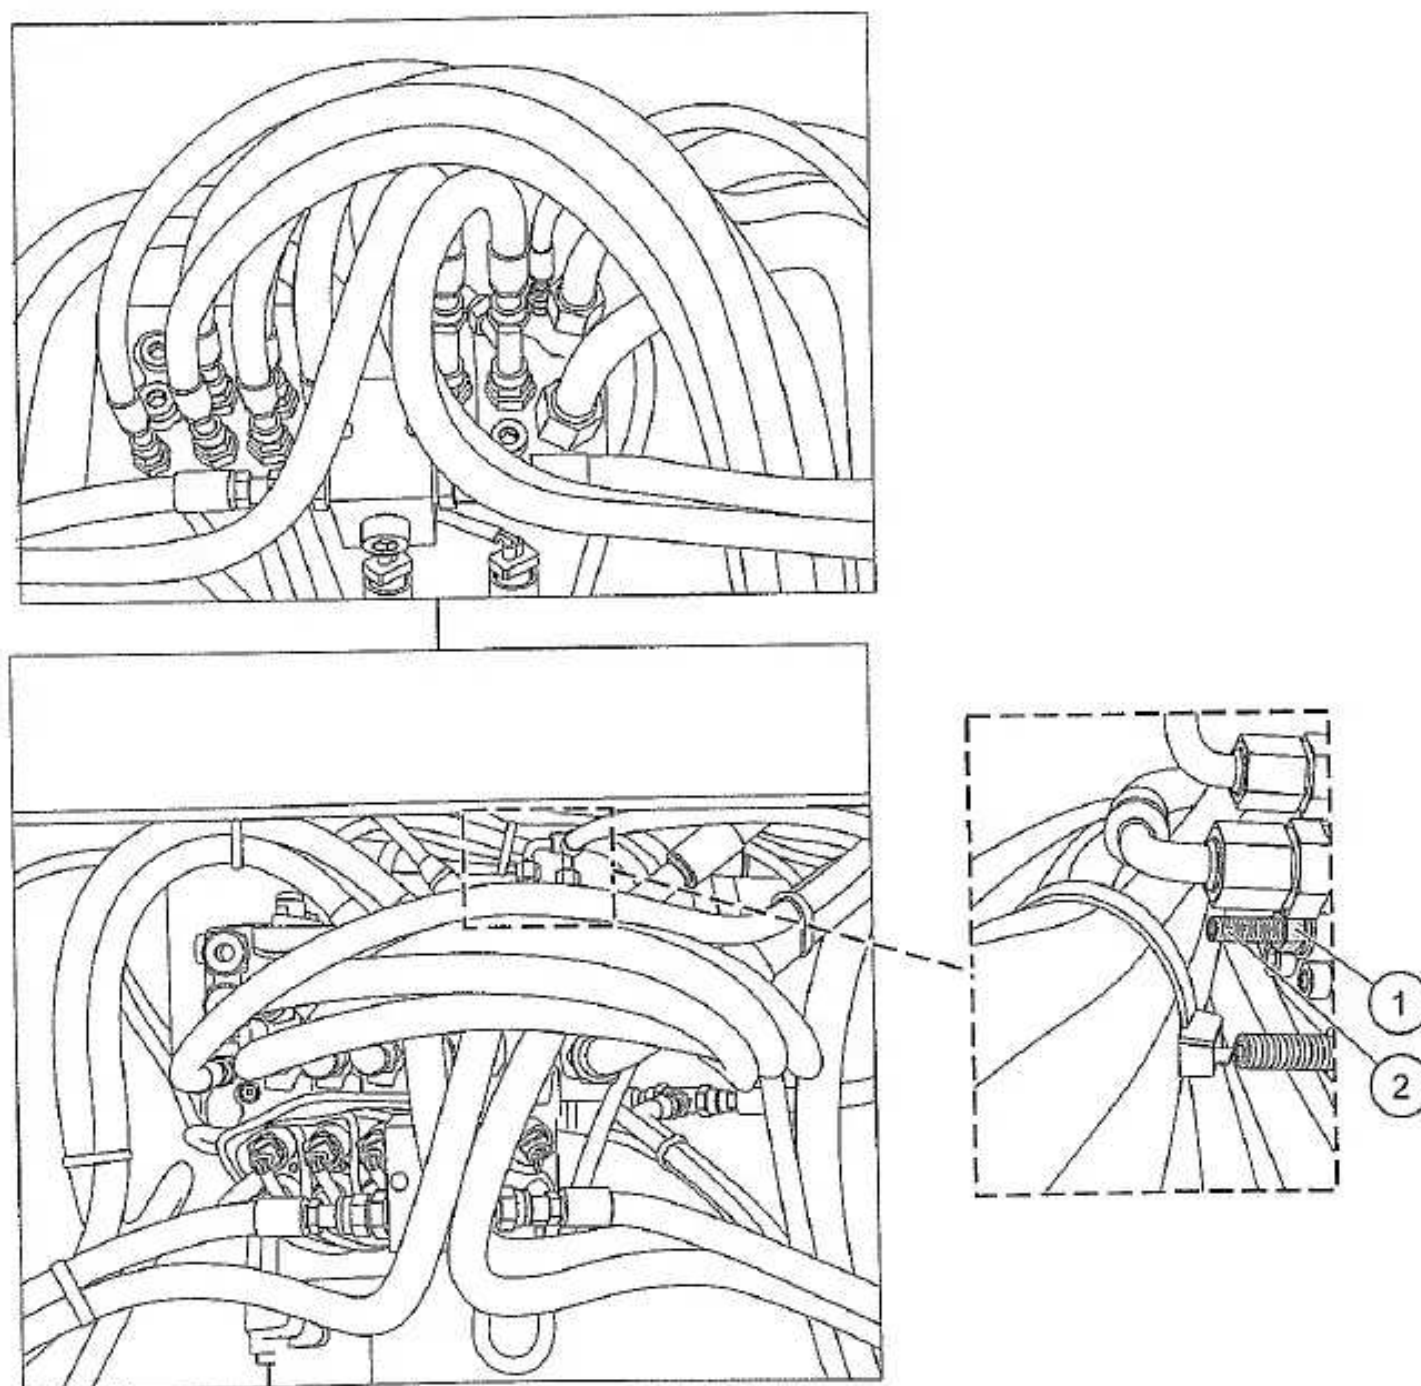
Emergency lowering for SMV 10-16, L90 Main valve
